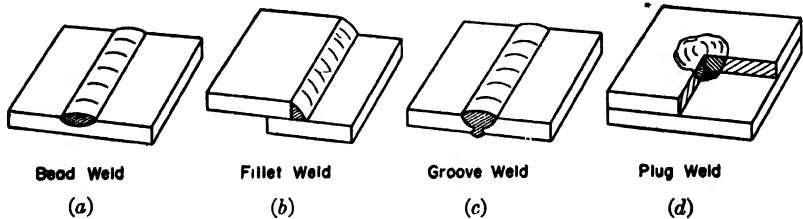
Sketch showing the four basic types of welds.
